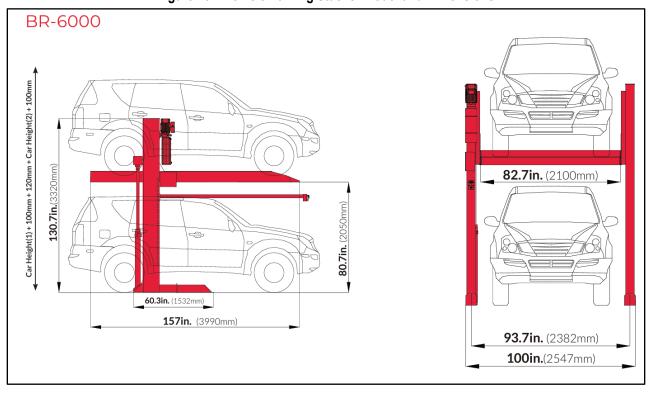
Vehicle Parking Stacker Model and Dimensions
